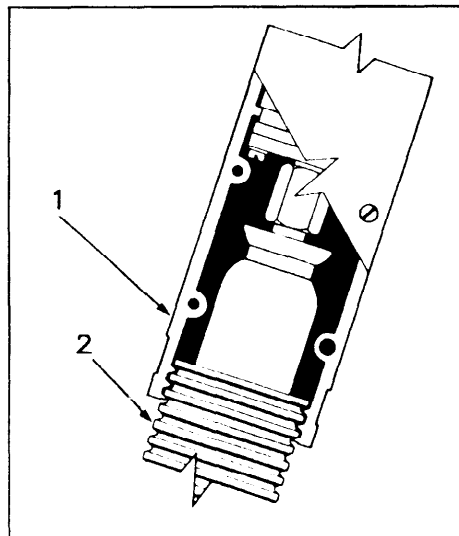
1 Pivot sleeve shell, 2 Hose covering
